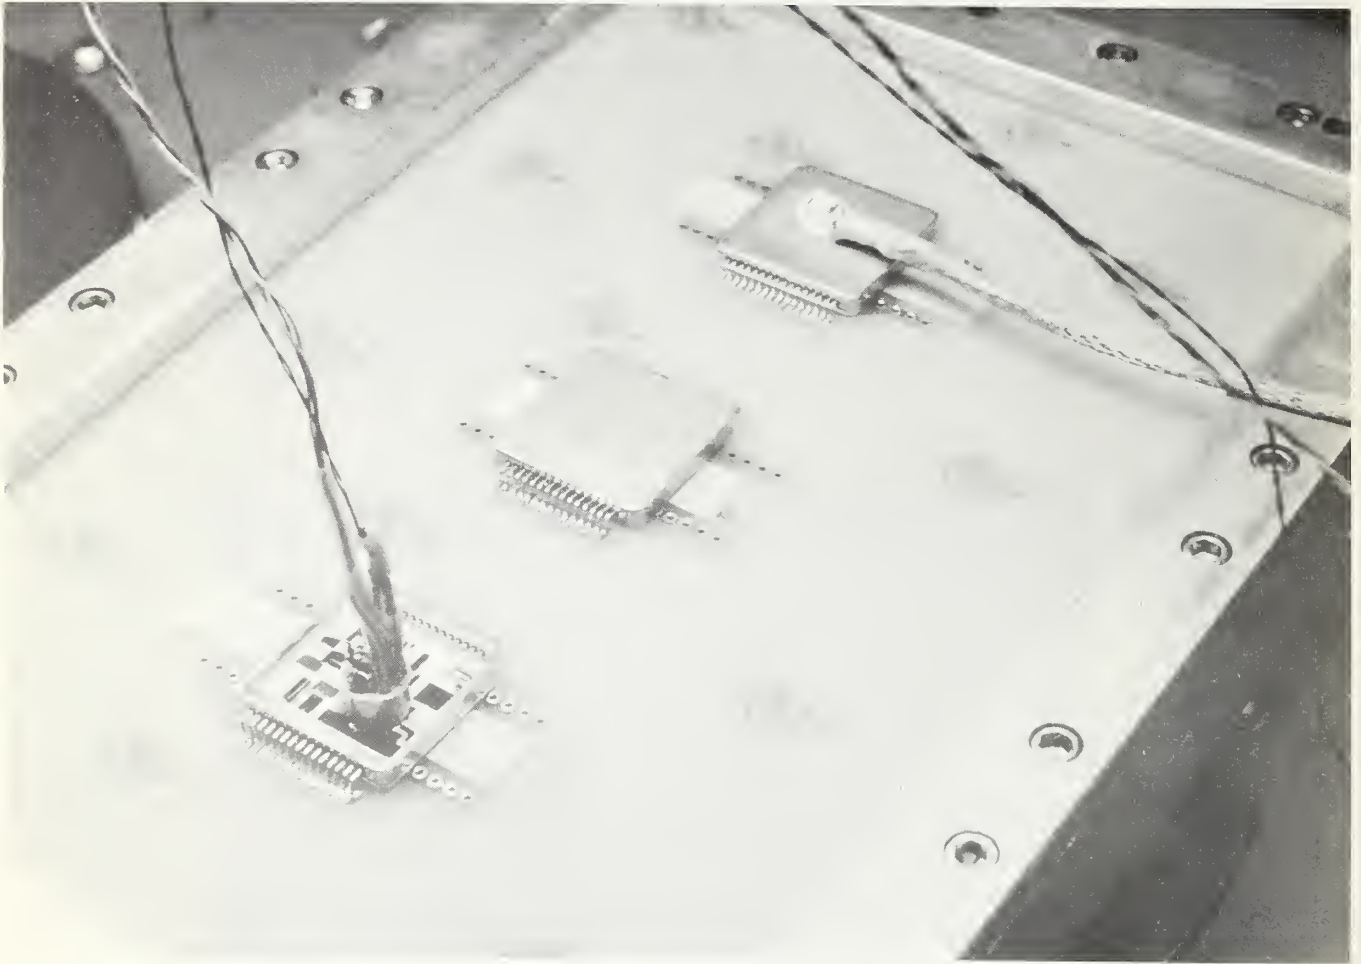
A closeup of the vibration mount and the printed circuit board with three flatpack hybrids soldered on it. The accelerometer that weighs only one gram is on the upper hybrid, and a TO-100 acoustic-emission detector (sec. A-2.1) is shown on the lower hybrid.
